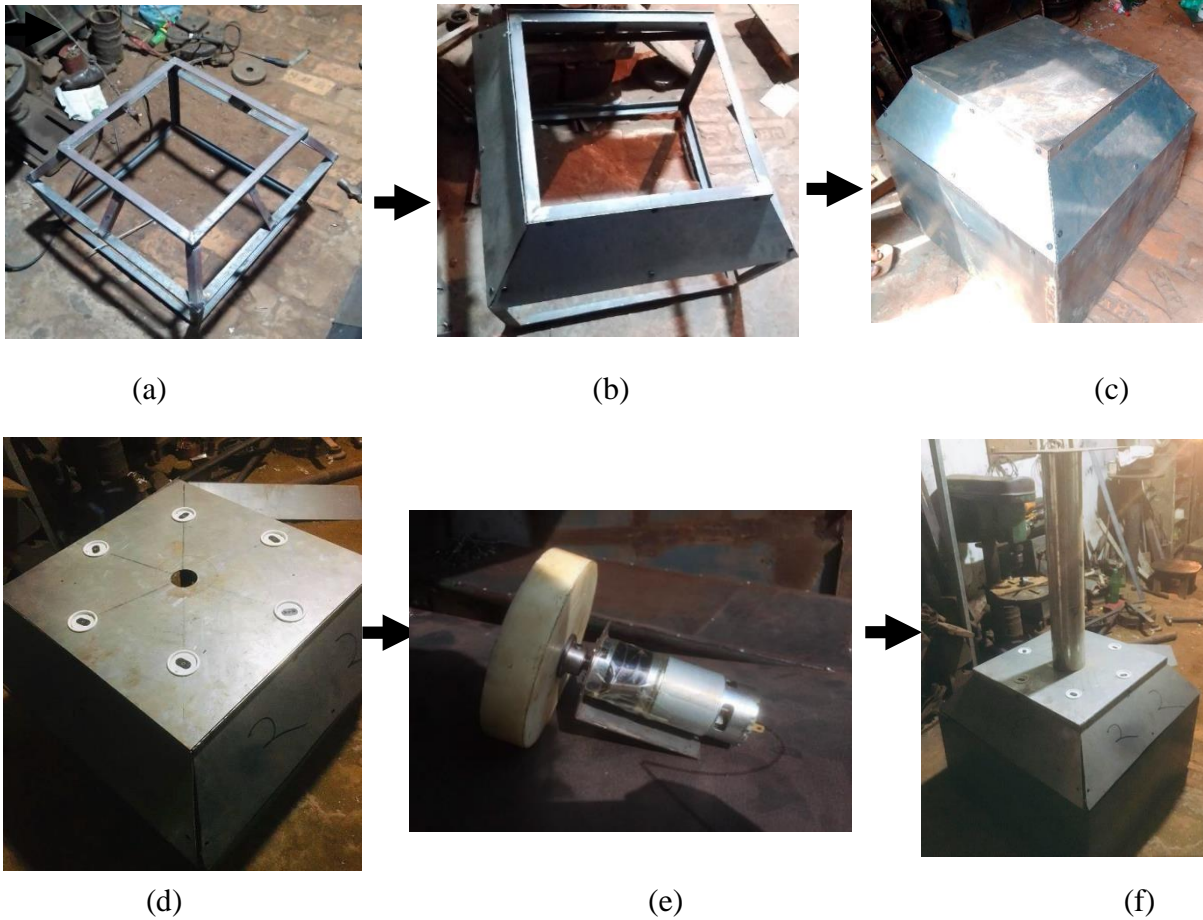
Mechanical Part of The Disinfecting System Before UV Light Setup (a) The primary posture of the setup (b) Body Surface Setup (c) Execution of Lower Body Setup (d) UV light holder setup (e) Design of motor (f) Final model before setting UV lamp.
